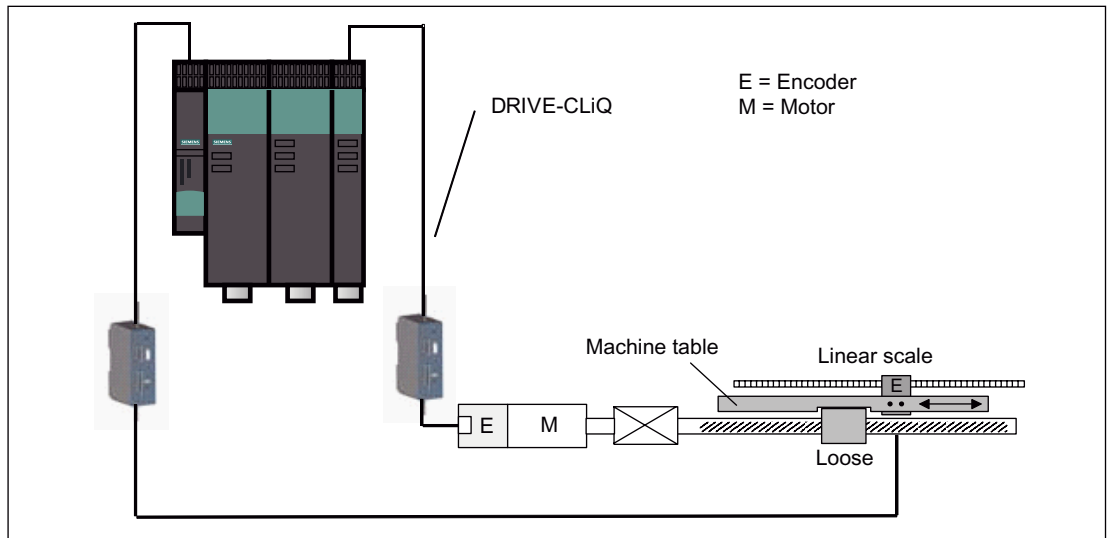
Example of a two-encoder system on a linear axis via ball bearing spindle
